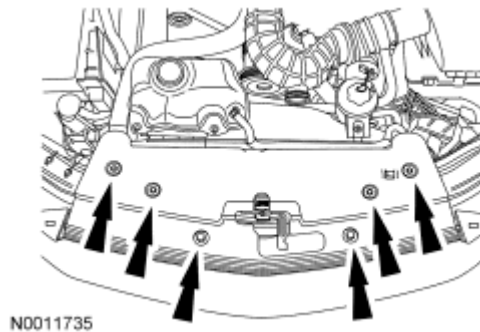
Locating Pin-Type Retainers And Radiator Sight Shield
